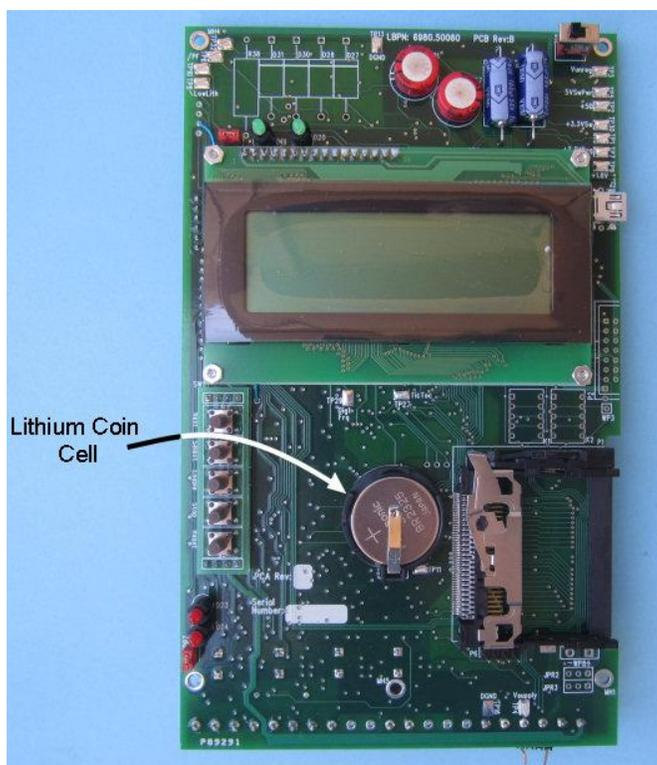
; IL-Mini Printed Circuit Board (PCB) and Lithium Coin Cell
